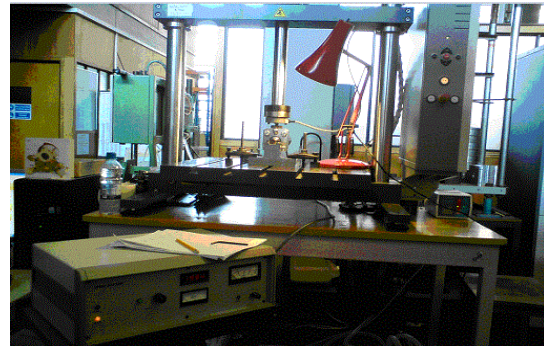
Setup of ultrasonic welding device and their accessories with generator, controller and sets of spot welded specimens
